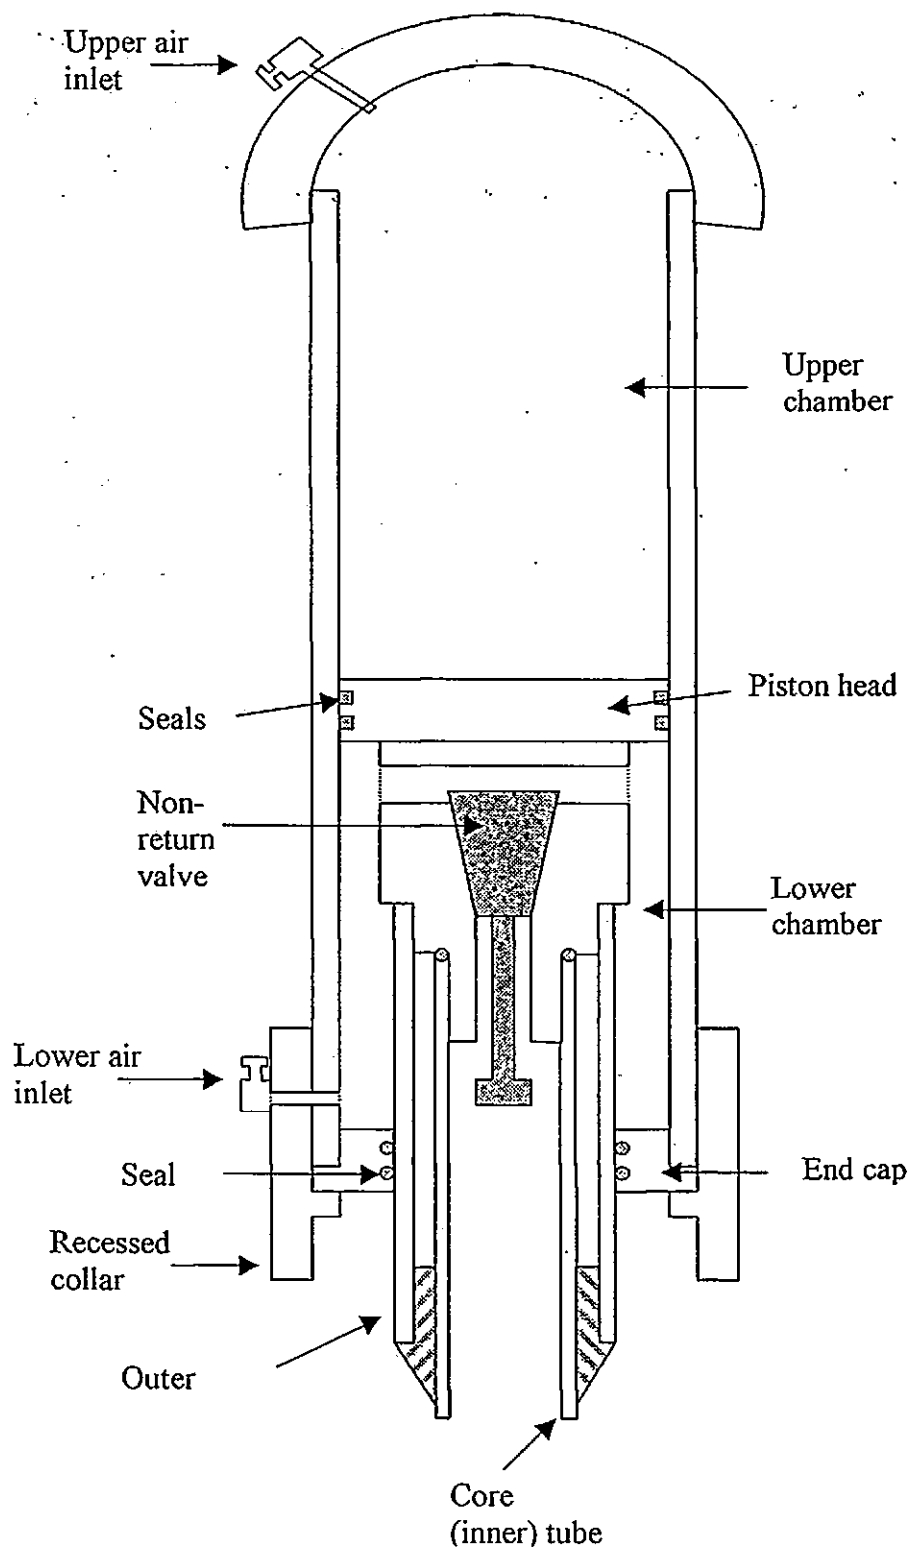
Coring mechanism (without piston rod) – Not to scale
